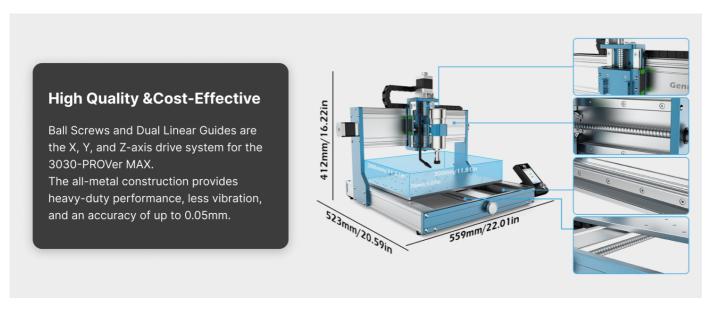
Illustration of the machine's dimensions and detailed views of the ball screws and dual linear guides on the X, Y, and Z axes, highlighting precision engineering.
